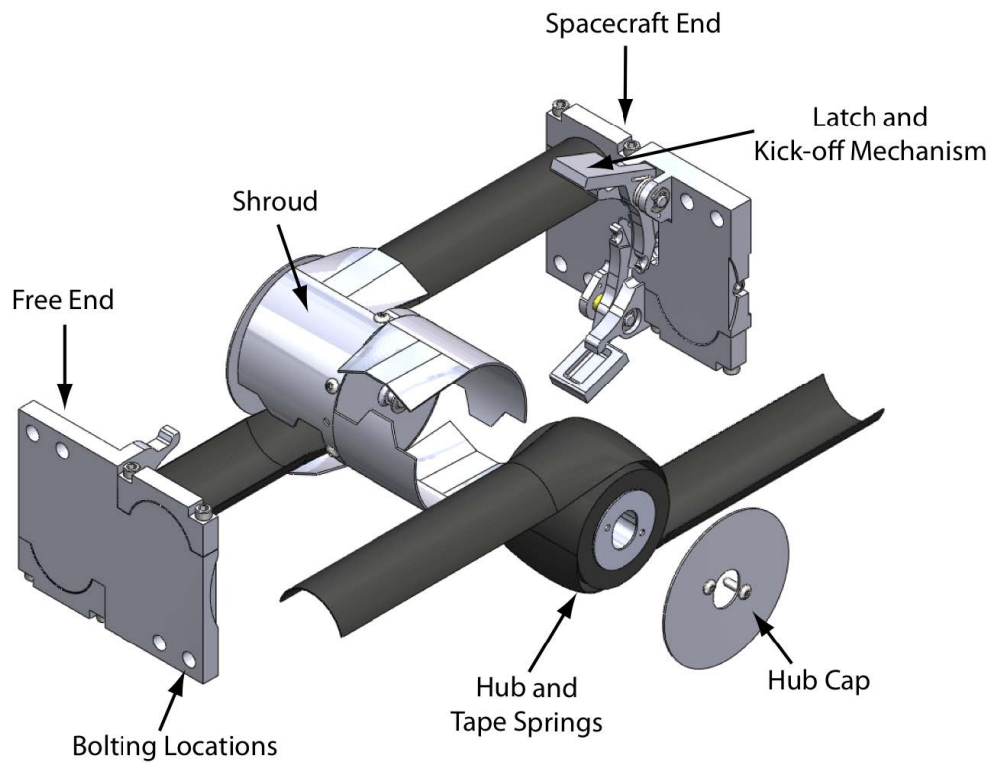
Exploded hub view of a CubeSat boom in initial stage of deployment [16].
